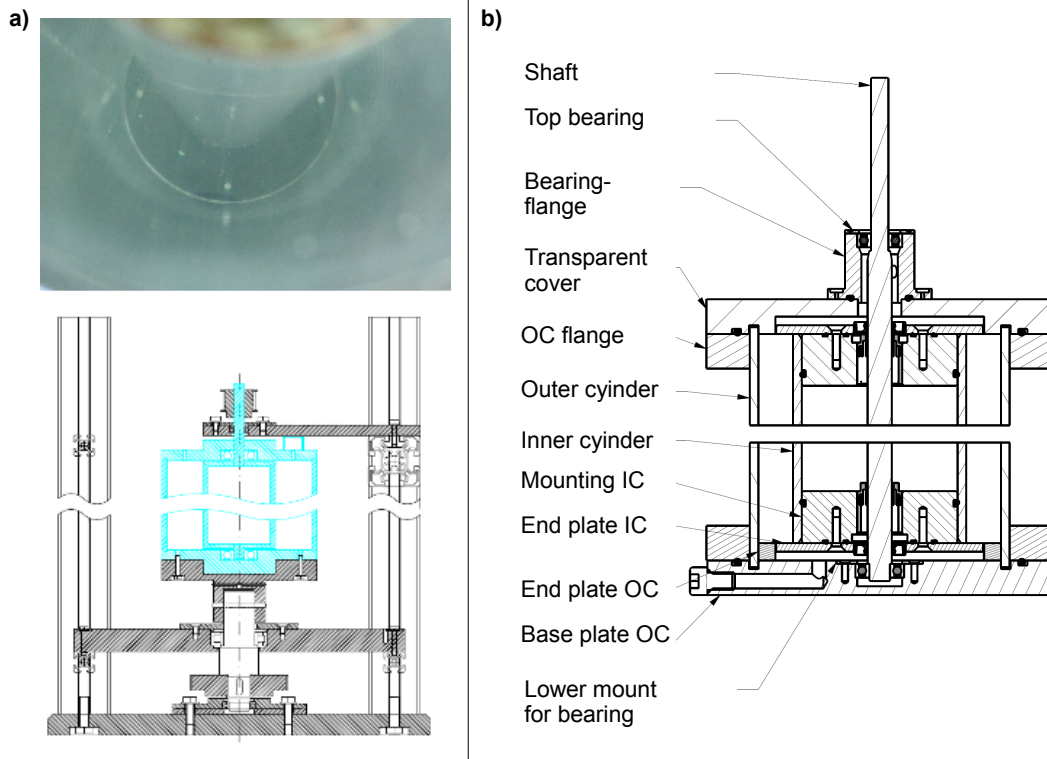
Top view Taylor-Couette Cottbus. a) View through the top end plate into measurement volume and drawing of the whole setup. A more detailed drawing of the highlighted part is shown in b).
